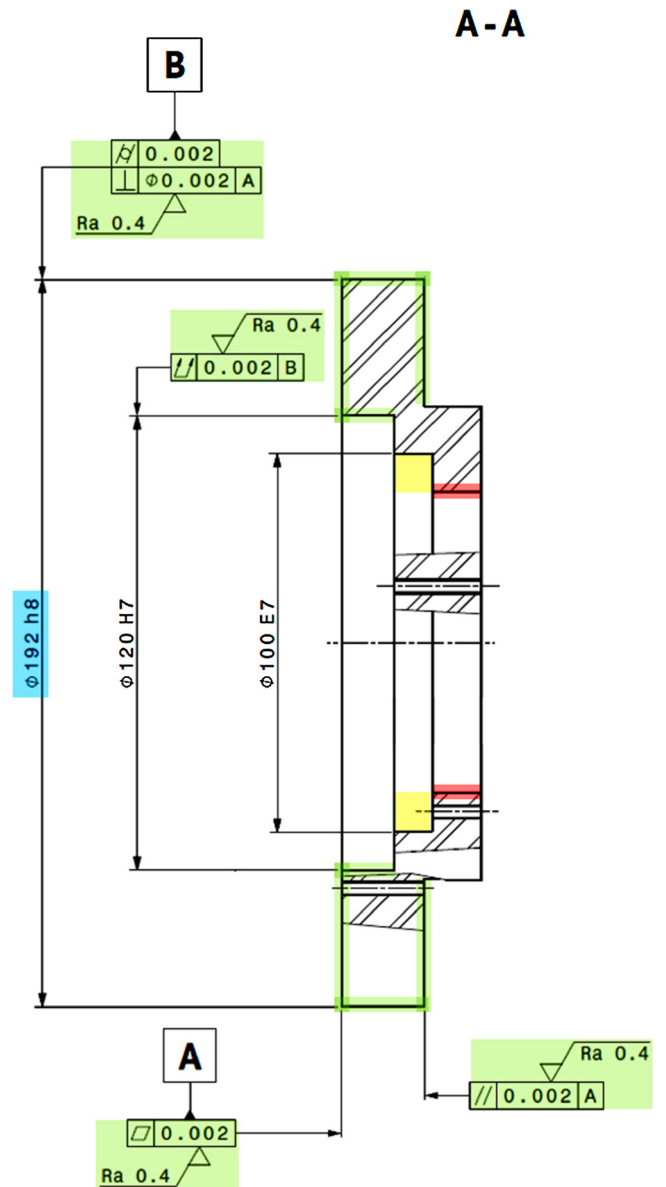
Technical drawing of the rotor showing the $2\mu\text{m}$ tolerances required from the air pads (green) and the largest dimension (192 mm – blue). The location of the ceramic ring (required for successful use of the piezo motor) is highlighted in yellow while the open surface required for powder removal is in red.
